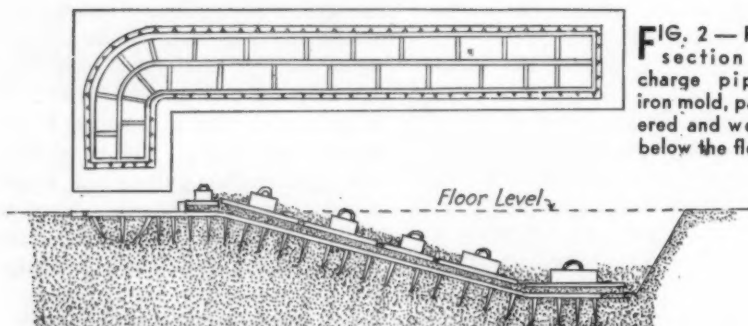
Plan and section of discharge pipe core iron mold, paper covered and weighted below the floor level.
